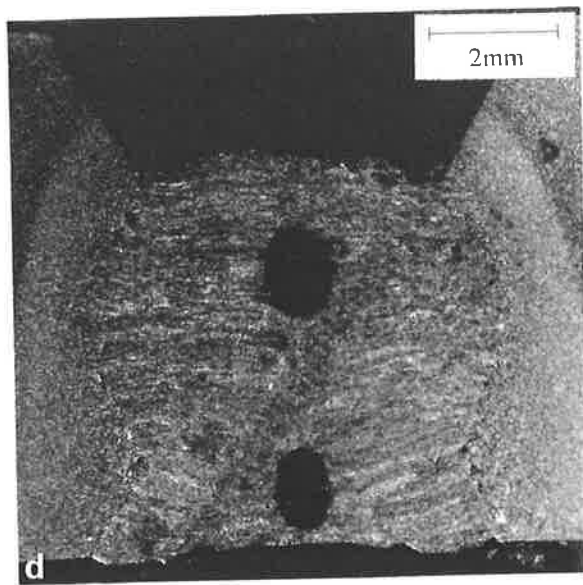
Macrograph of a weld with hollow bead pores located near both root and top surfaces of the weld. Welding conditions: weld travel speed 300mm/min, welding current 190A (the voltage was not recorded). Root gap 0.5mm and root face 2.5mm.
